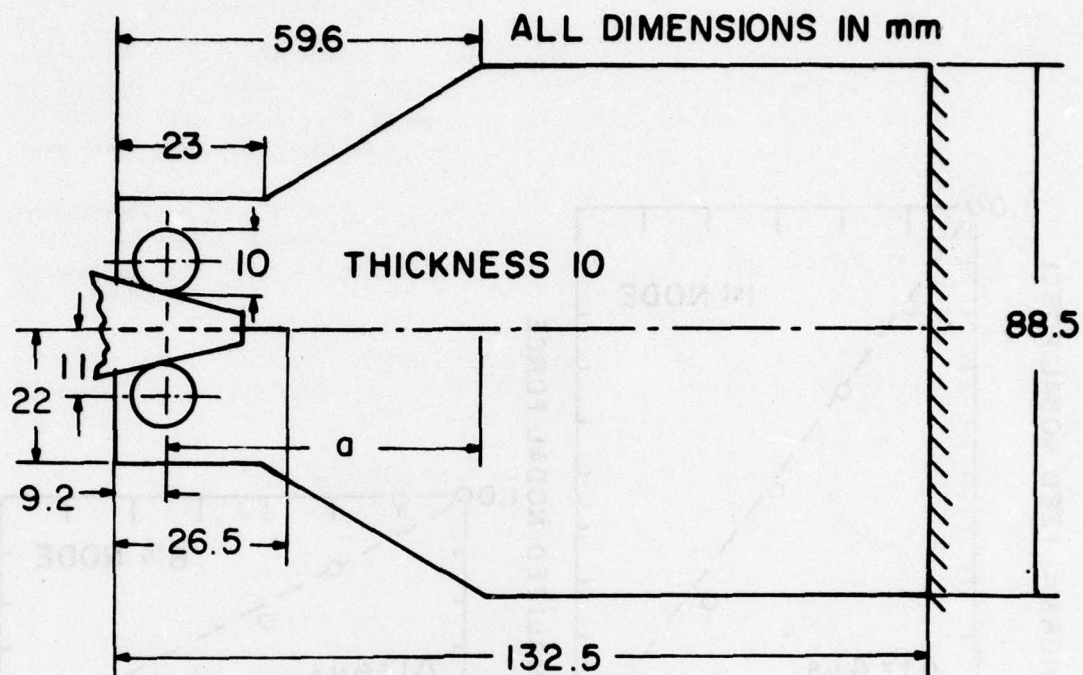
WEDGE - LOADED RDCB SPECIMEN.
